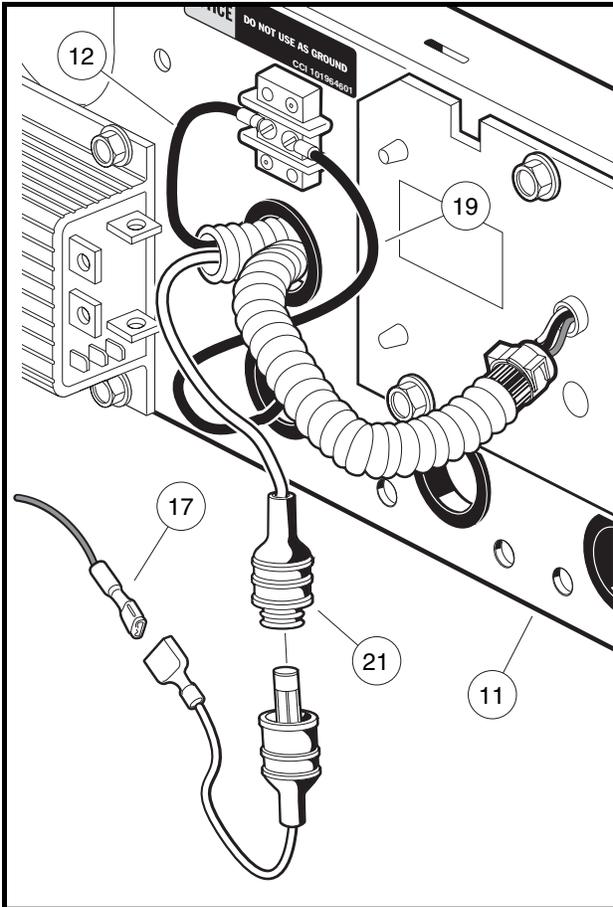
Charger DC Cord Black Wire and Blue Wire
